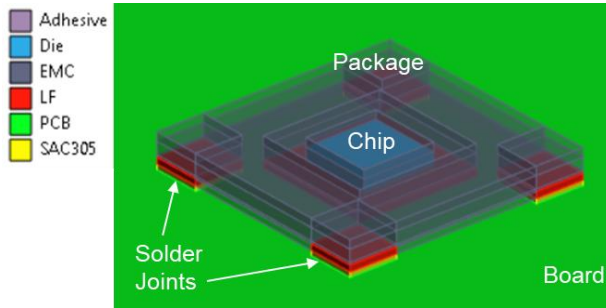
The geometry of the package-on-PCB assembly test case. The QFN package contains a centrally placed silicon die attached to the copper leadframe (LF) with the die-attach (adhesive) and encapsulated with EMC. Four solder joints connect the copper pads of the package and PCB.
